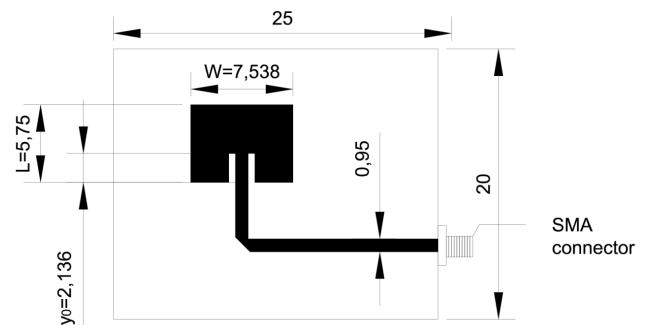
View and dimensions (in mm) of the designed sensor [20].
